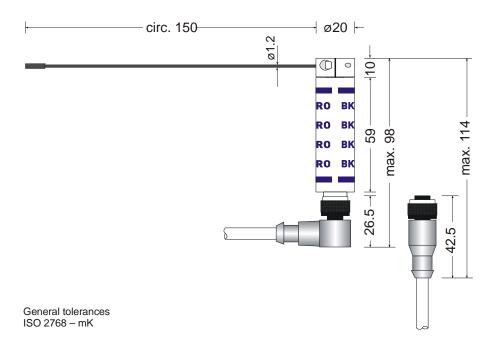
Mechanical Dimensions – Scanner TK7A / TK7RL
